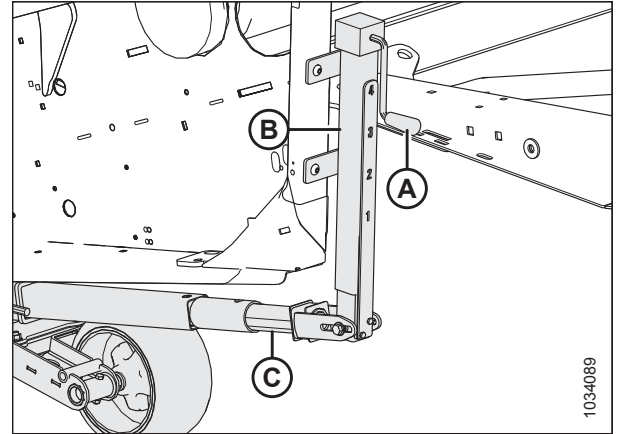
Jack and Outboard Wheel Assembly – View from Rear, Left Shown, Right Opposite
